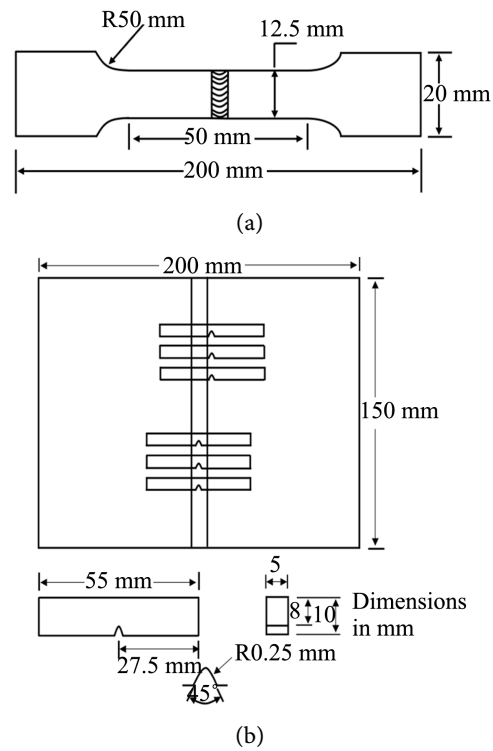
Schematic illustration and dimensions of (a) transverse tensile test specimen of the welded joint, (b) V-notch location of the impact test specimen in the BM, HAZ and WM.
